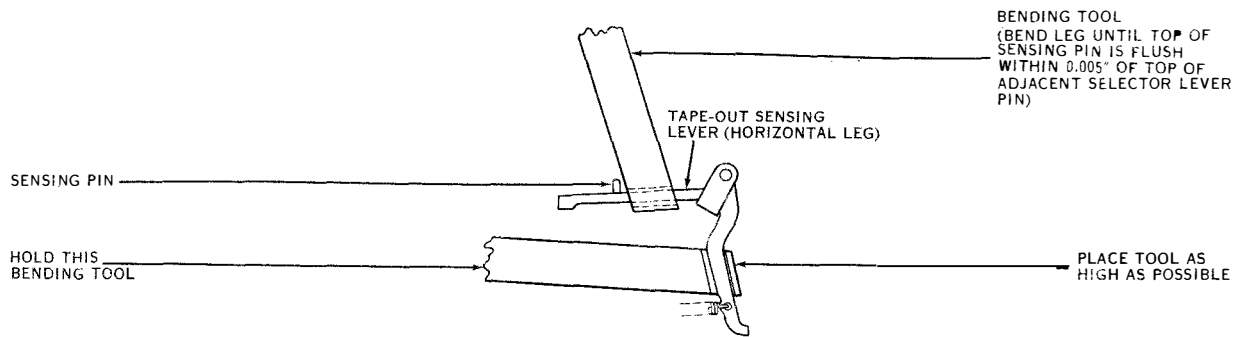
Placement of Bending Tool on Tape-out Sensing Lever (Horizontal Leg)
